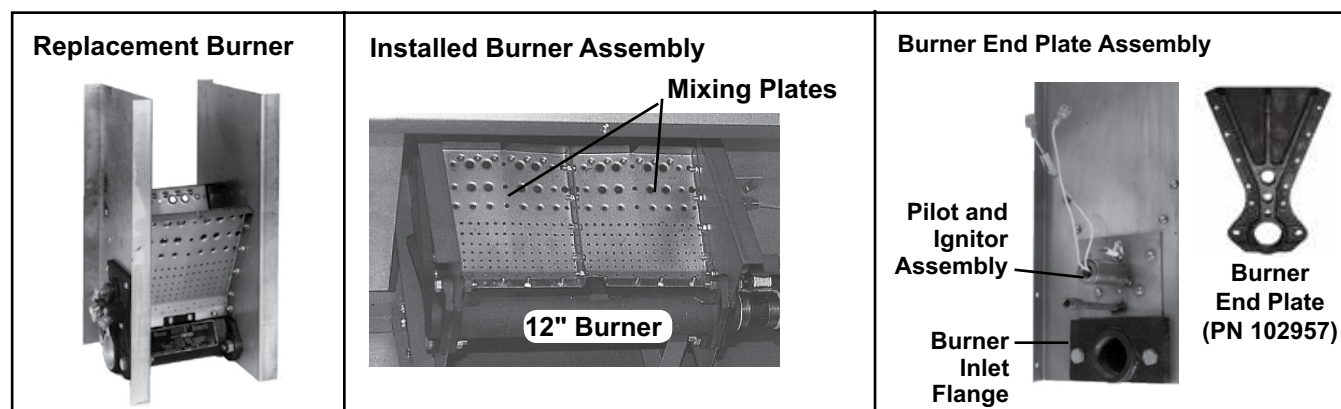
Burner Assembly—Units Manufactured *Before* SEP 2003
